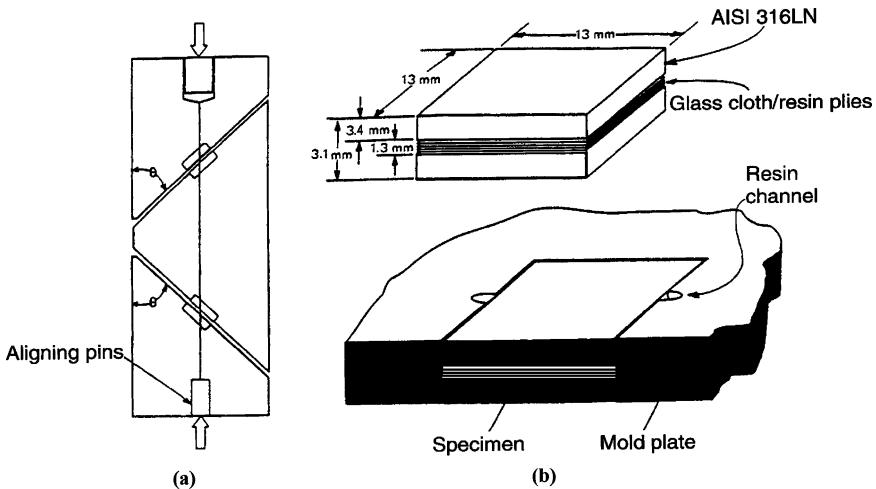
(a) Schematic of test fixture and specimens used to load two composite insulation specimens in shear and compression. (b) Specimen configuration (later specimens were circular in shape) and mold used to fabricate specimens using either the VPI or PP process.
